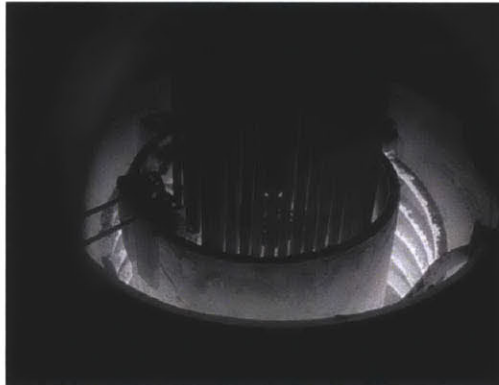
EBR-II fuel pins being fabricated by injection casting. [7]
